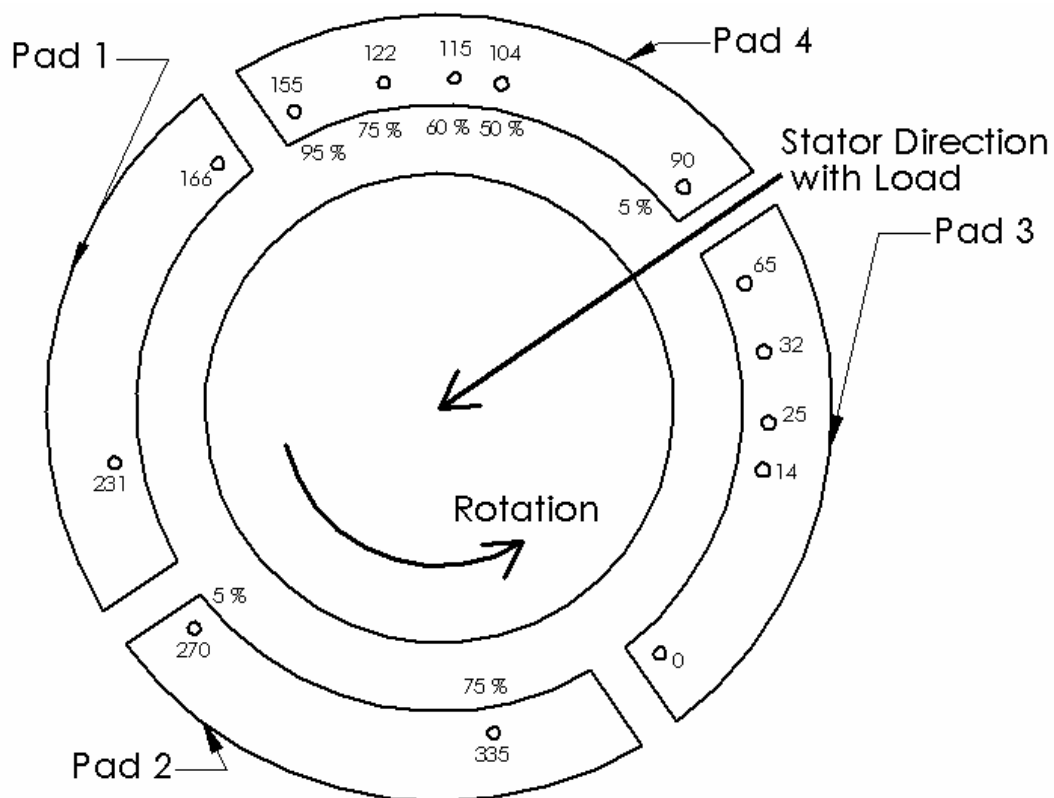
Flex-Pad Thermocouple Placement (DE View)
